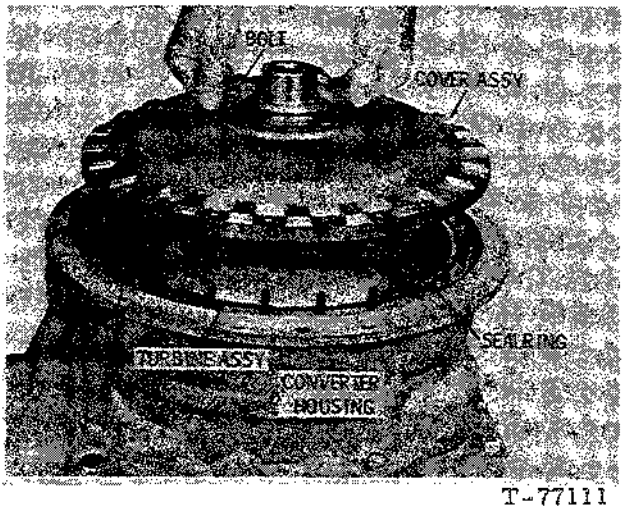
INSTALLING TORQUE CONVERTER DRIVE COVER - DIRECT MOUNT
